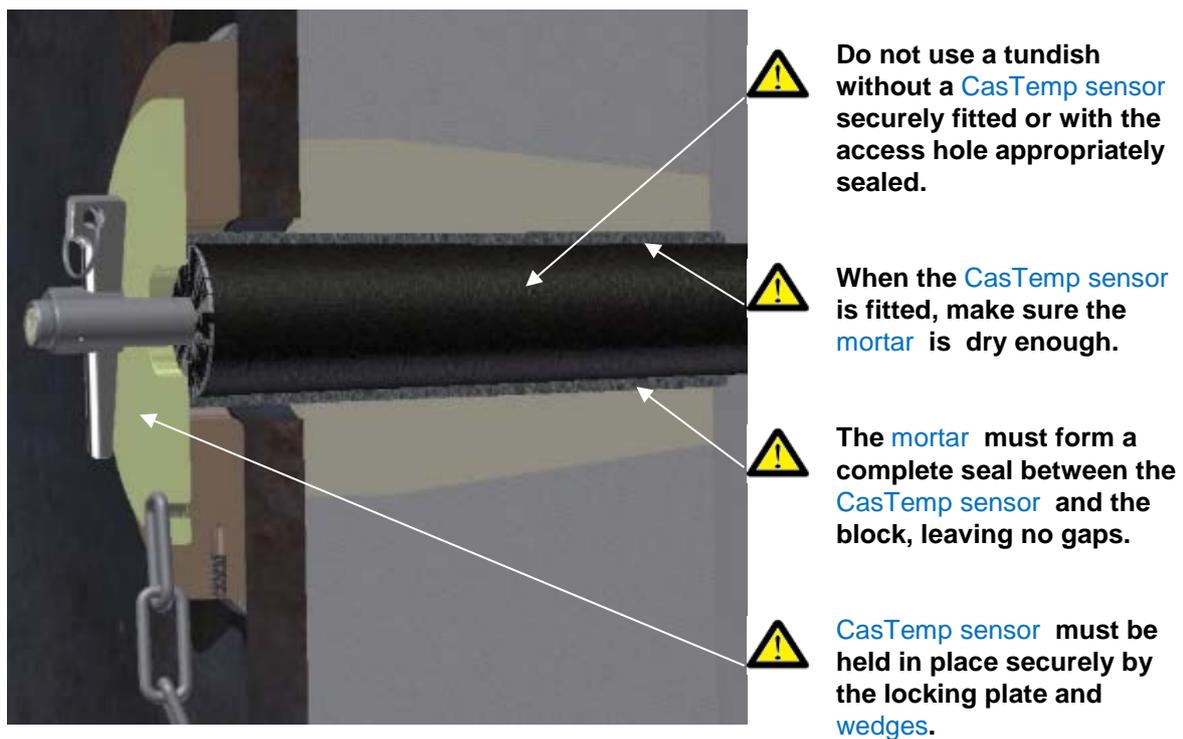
Important checks when fitting the [CasTemp sensor](#)
